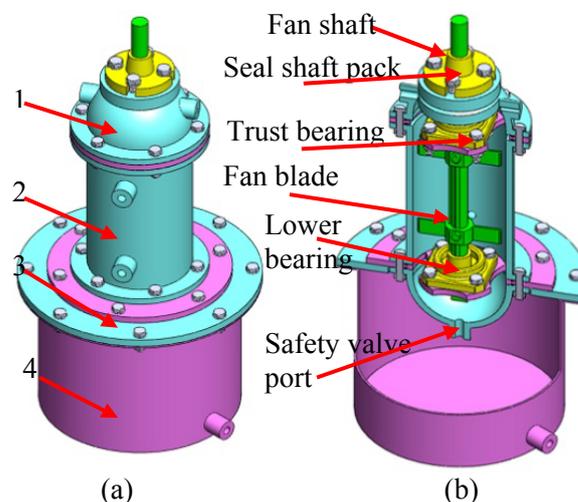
(a) Mixing tank layout (b) Section view of mixing tank and detail.
